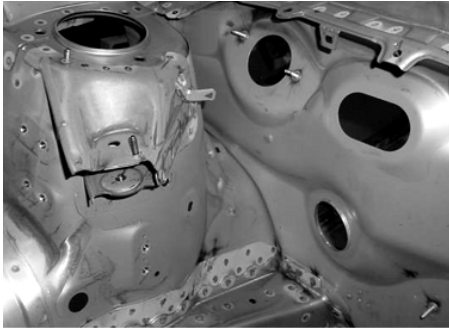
Part of the motorcar body structure manufactured using the different assembly technologies
